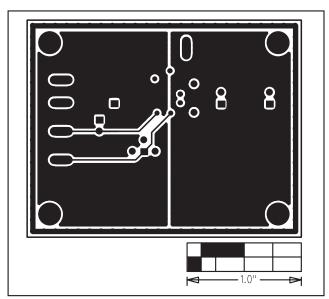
MAX9700B EV Kit PC Board Layout—GND Layer 2
